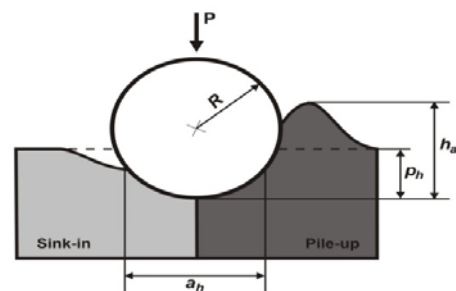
Contact of the burnishing ball with the material. The burnishing imprint is defined by:  $a_h$ : imprint width;  $p_h$ : imprint depth;  $h_a$ : pile-up height;  $R$ : burnishing ball radius;  $P$ : burnishing force.
